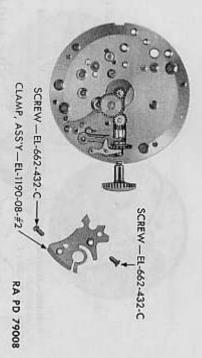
Elgin Wrist Watch - Minute Wheel Clamp Assembly Removed
